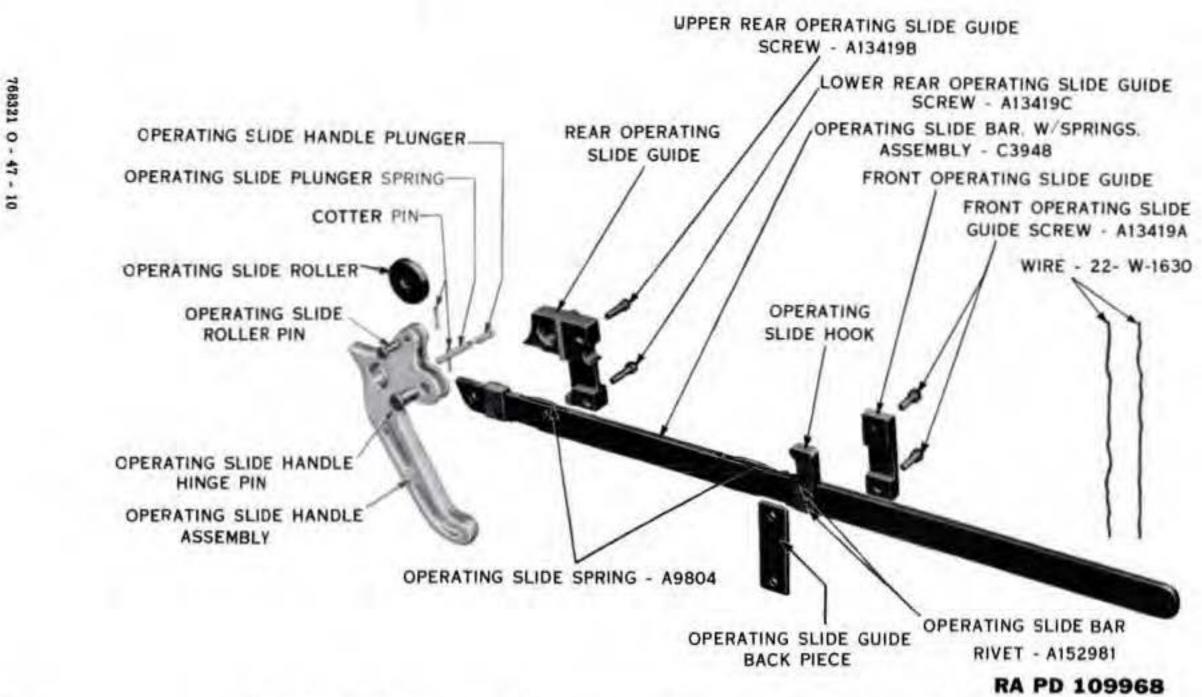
Operating slide group-exploded view when assembled to left side of gun.
